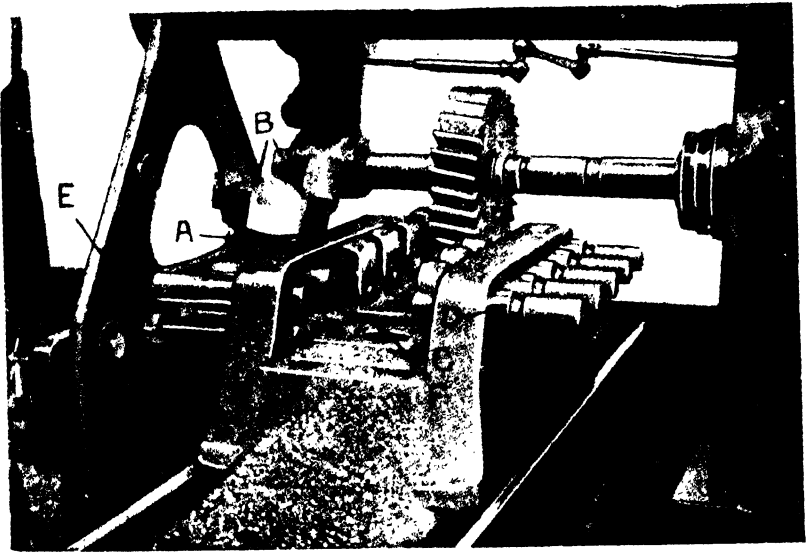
"STRING" FIXTURE USING AN INTERLOCKING CUTTER AND MILLING AUTOMOBILE STUB AXLES.
